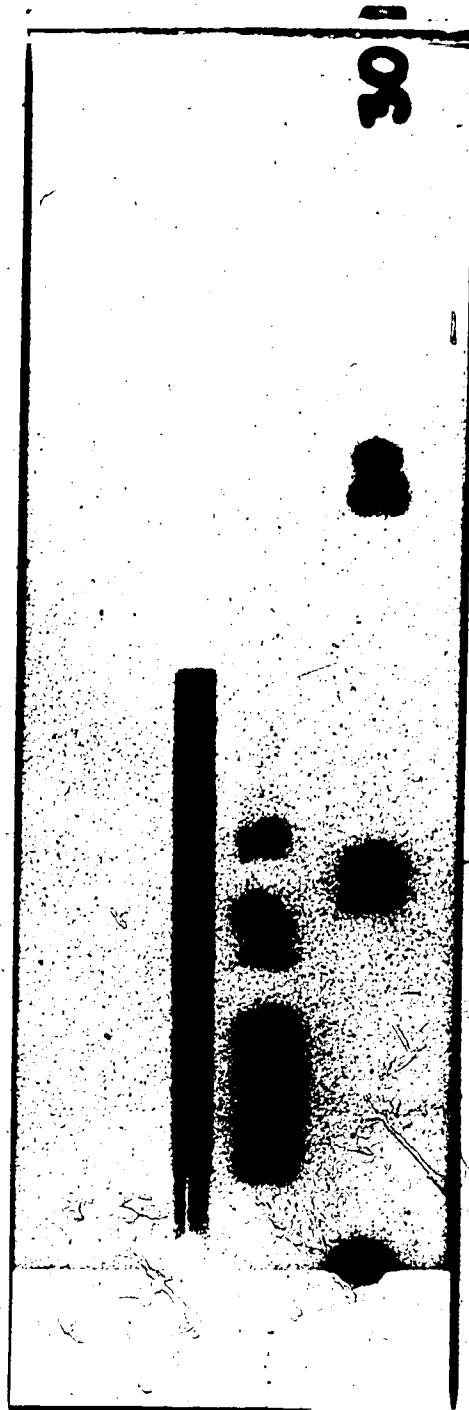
Radiograph of specimen 1 - IP flaw (reduced size).
